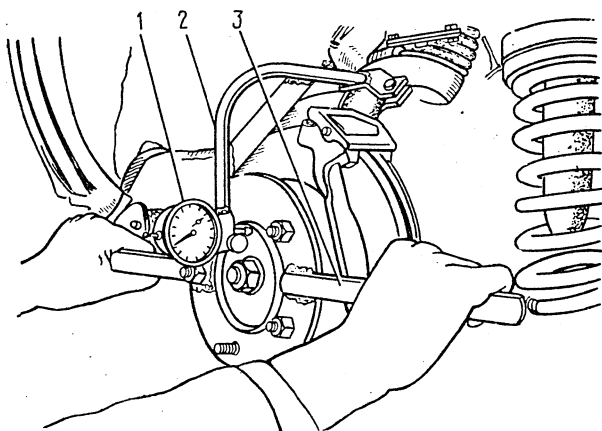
Checking the End Play in Front Wheel Hub Bearings:
